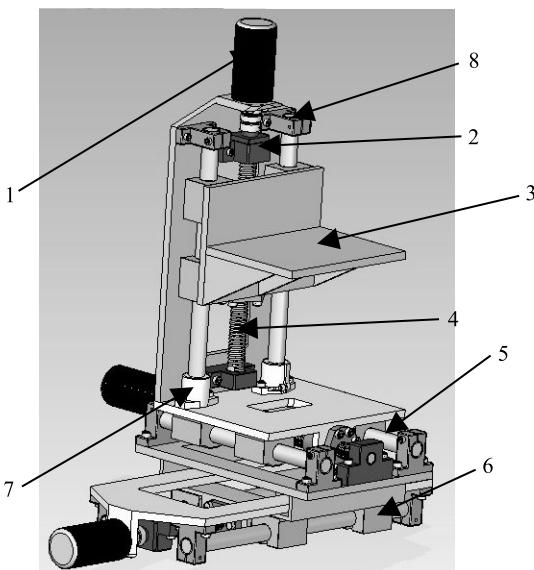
Designed vision system (1 – stepper motor, 2 – bearing block rack (drive side), 3 – table camera, 4 – screw bullets (Train), 5 – fence, 6 – linear bearings in the housing, 7, 8 – handle)
